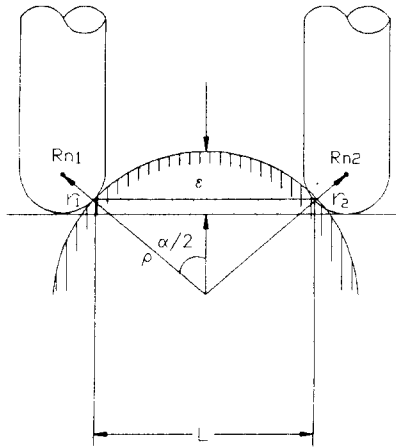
The Tolerance in Machining of a Convex Surface
